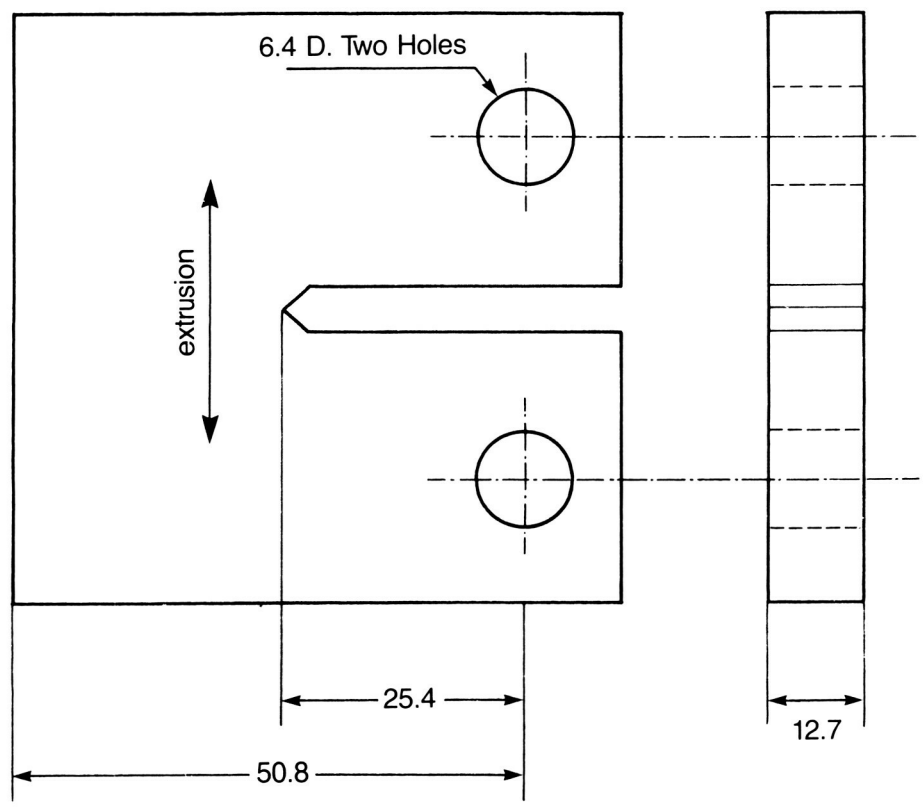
Schematic View of the Compact Specimen. (all dimensions in mm)
